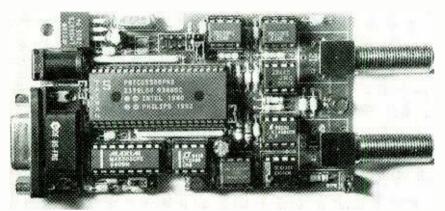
THE COMPLETED BOARD. The leads should be trimmed to the length of the IC socket pins to allow the board to sit flat at the proper height in the enclosure.
